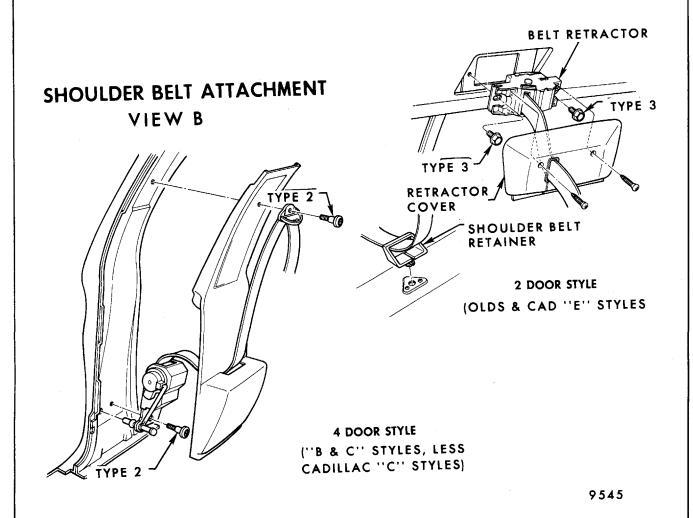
Front Seat Shoulder Belts - B,C and E Styles, Less Cadillac C Styles
